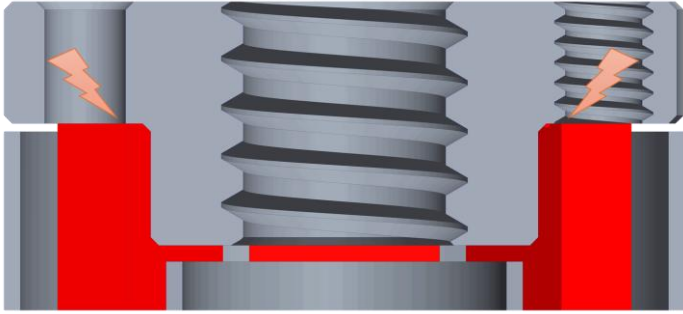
Explanatory view of the sensor structure with marked critical elements for proper mechanical integration
